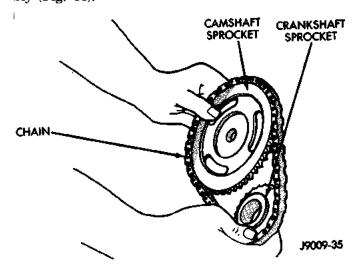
Camshaft and Crankshaft Sprocket and Chain
